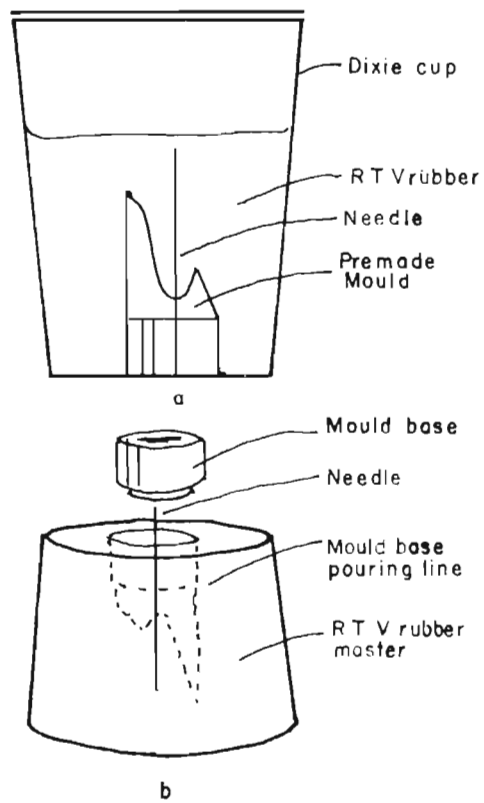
Method of making a master mould of R.T.V. silicone liquid-rubber compound, from a pre-made head mould.
